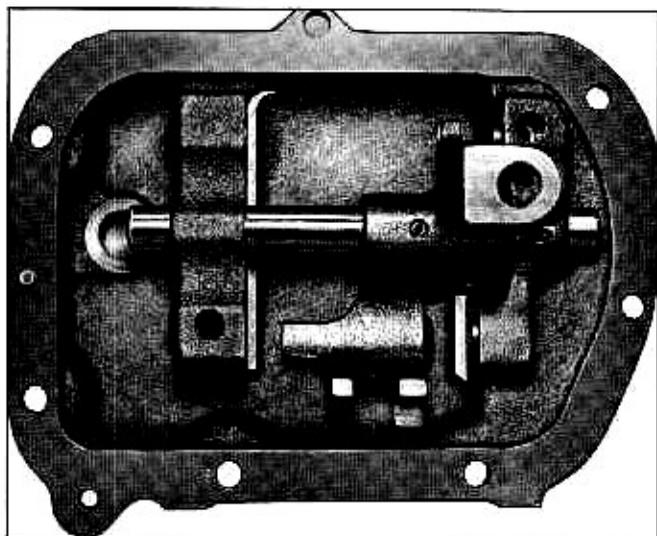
A—2-3 Shifter Head & Shaft Installed to Cover
